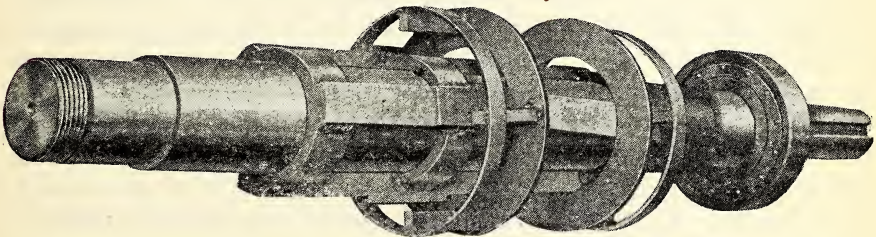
The shaft of the armature shown in Fig. 5-40. The supports for the laminations and the commutator are of structural pieces welded together. *Courtesy of the Electrodynamic Works, Electric Boat Co.
